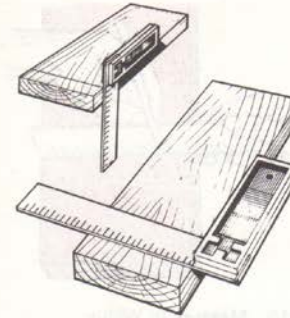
13 Squaring a Line on the Face and the Edge of a Piece of Stock
